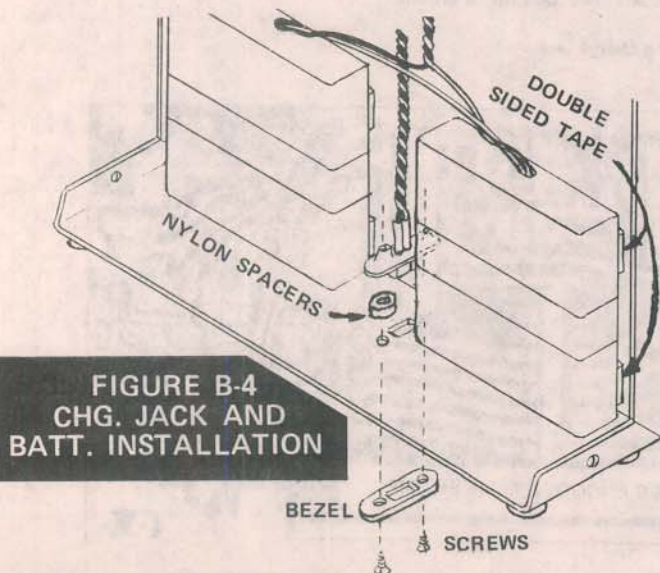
CHG. JACK AND BATT. INSTALLATION
